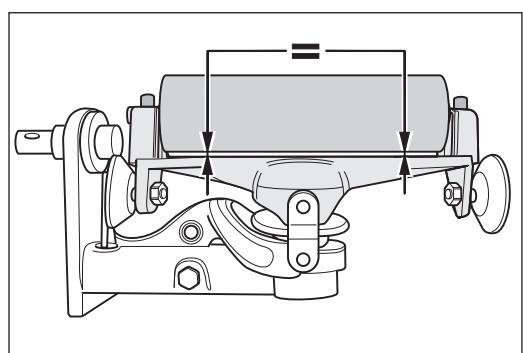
the tensioning roller is positioned parallel to the top of the drive unit.
